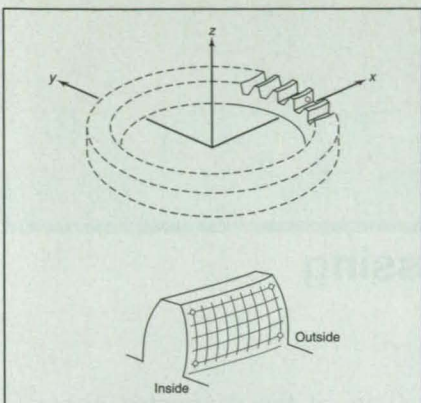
Nominal Points of Contact between the probe and the gear-tooth surface define a grid for mapping the surface and comparing with the corresponding surface of the master gear.
